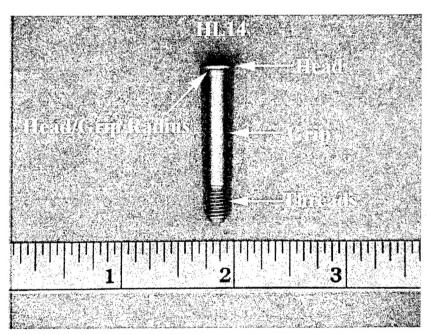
Overall Photo of Fastener HL14 (Shear Fastener). The tensile fasteners were similar except they contained a slightly larger head diameter than the shear fastener.
